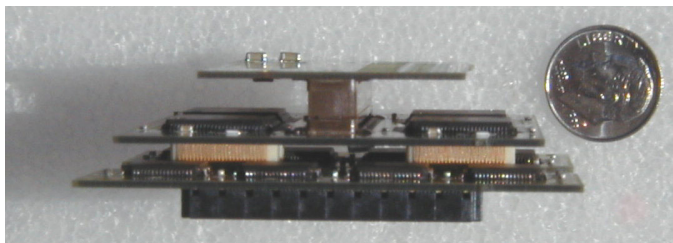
The photograph above shows a 64 channel detector mounted endcap wheel readout board. The upper board is an unstuffed connector board for power and data. The next lower board (center) houses four DTMROC ASICs and primarily handles digital I/O. The bottom board (4100mm²) has eight ASDBLR ASICs and connects directly to the end cap wheel straw anode connectors.
